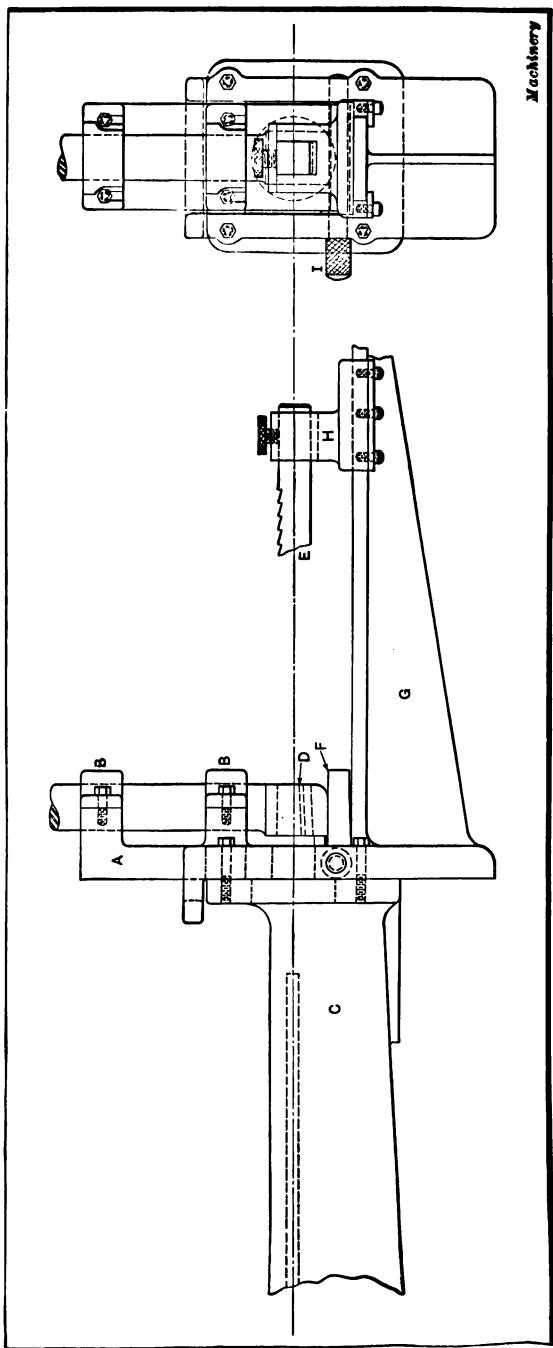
Special Broaching Machine with Fixture and One-pounder Gun In Place Ready for Broaching Rifle Grooves
